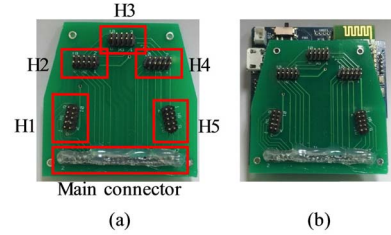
Photographs of the adapter board. (a) Front side photograph displays the position of each connector; (b) Combination of the adapter board and main board.
